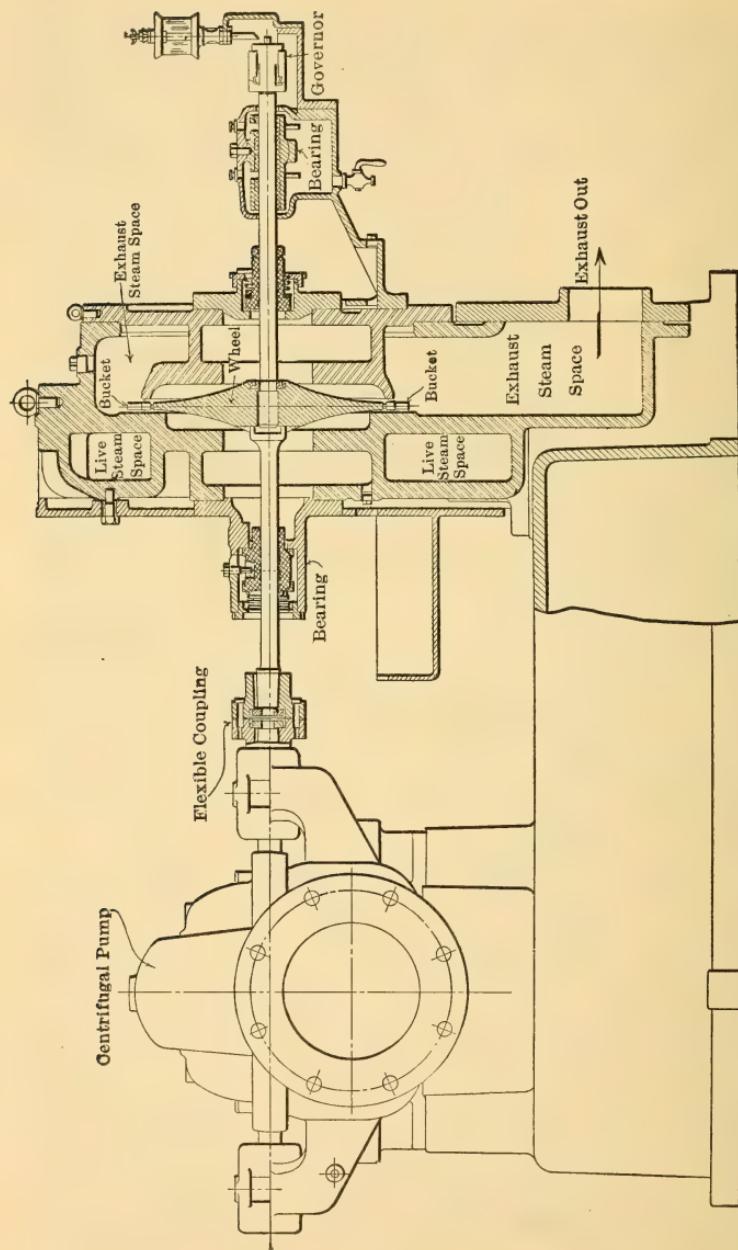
Section of De Laval Single Stage Impulse Turbine.
